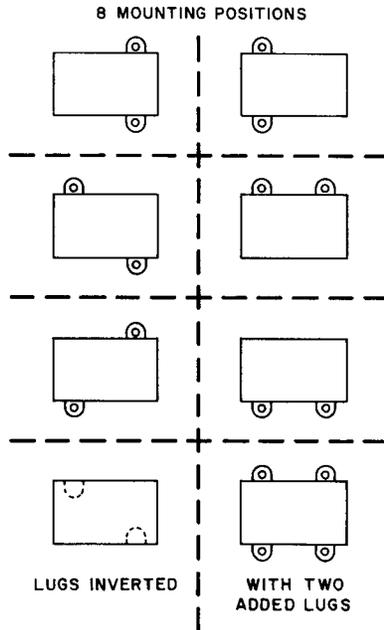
Assembly of KS-20202, Lists 1 and 2 Weatherproof Housing
